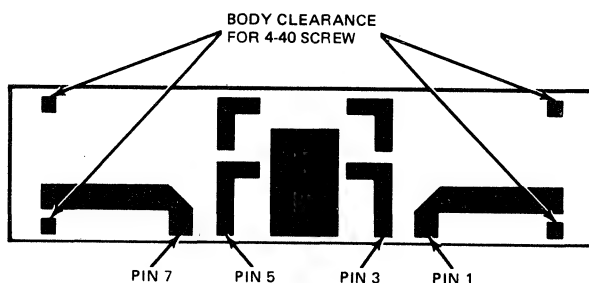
UHF POWER MODULE TEST FIXTURE
